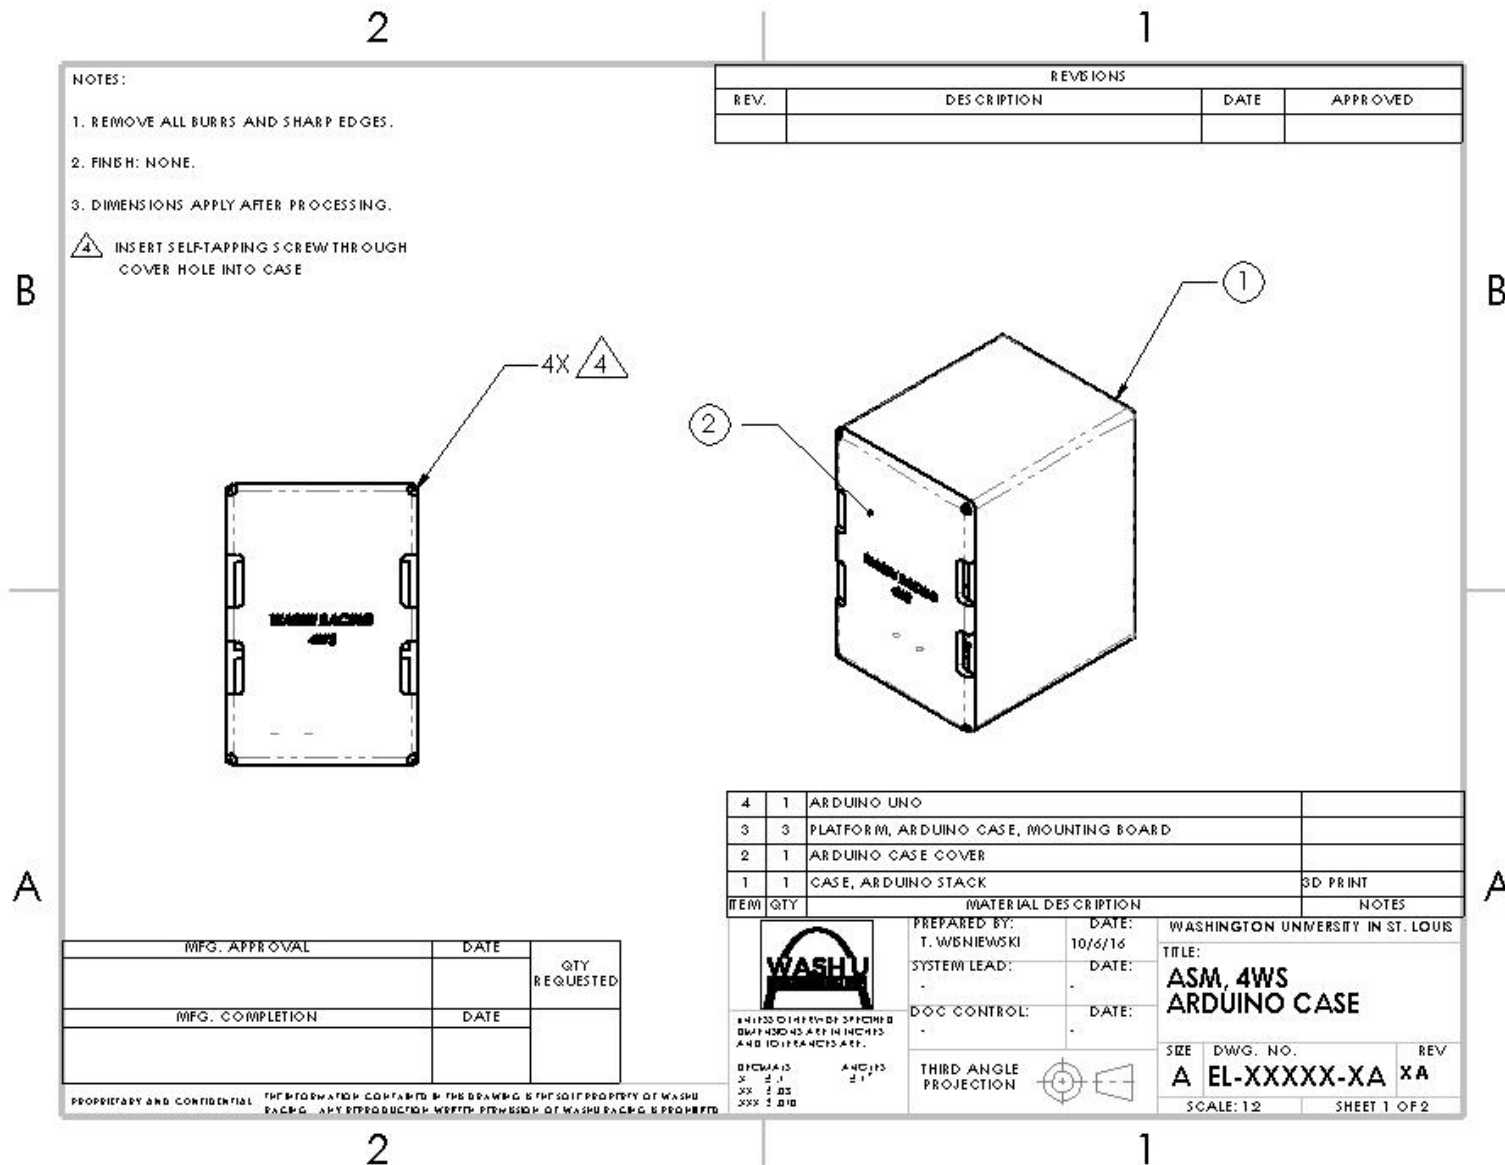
Draft assembly drawing for the Arduino case (sheet 1).
